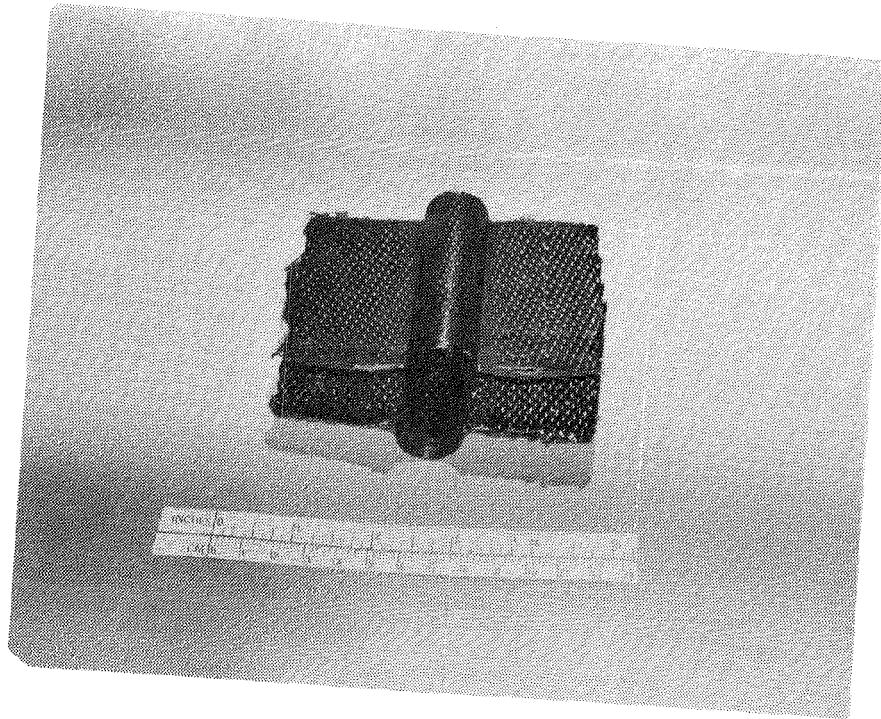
Two "Tee" Connector Web Blanks As Removed From Mold
